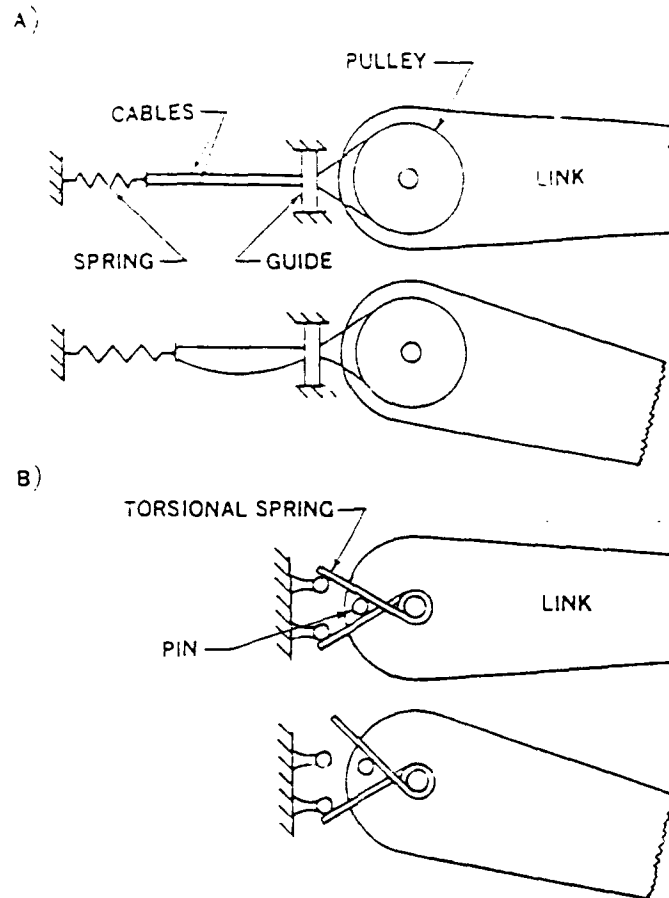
Spring Mechanisms. A) uses a constant force extension spring coupled to the joint through a pulley and cabling, B) uses a torsional spring on the joint axis.
